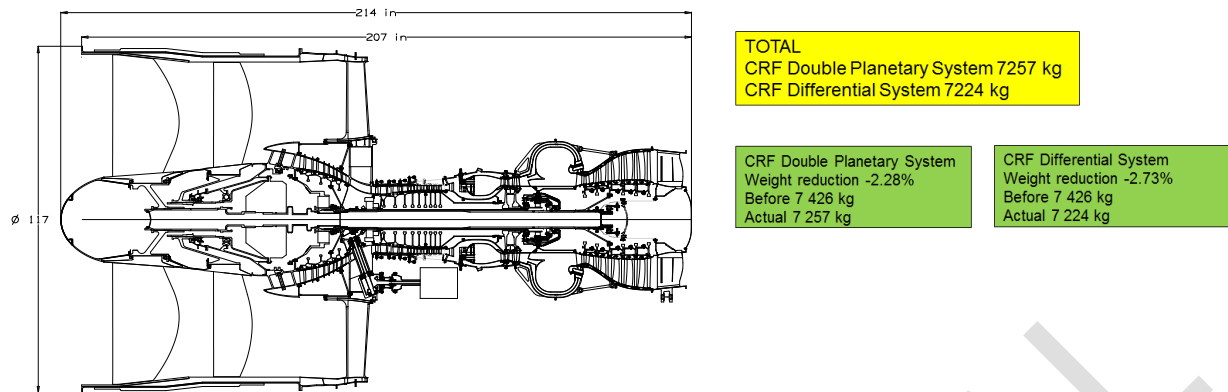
AHEAD hybrid CRF engine final dimensions and weight.
